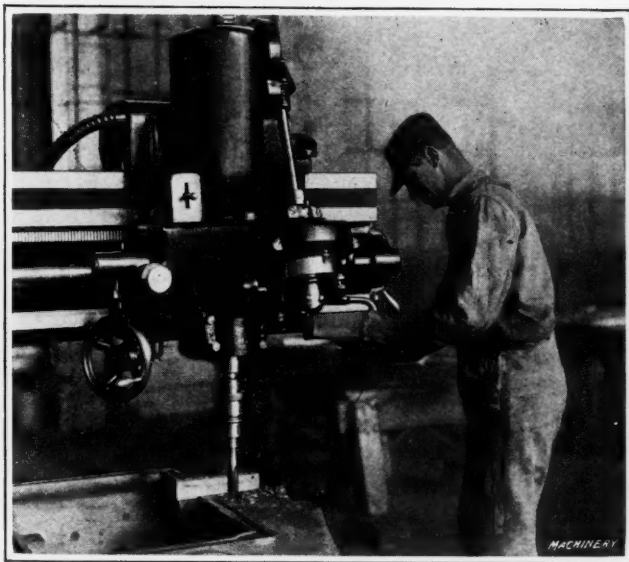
Close-up View of Drilling Head, showing Method of performing Tapping Operation by reversing Direction of Rotation of the Motor
